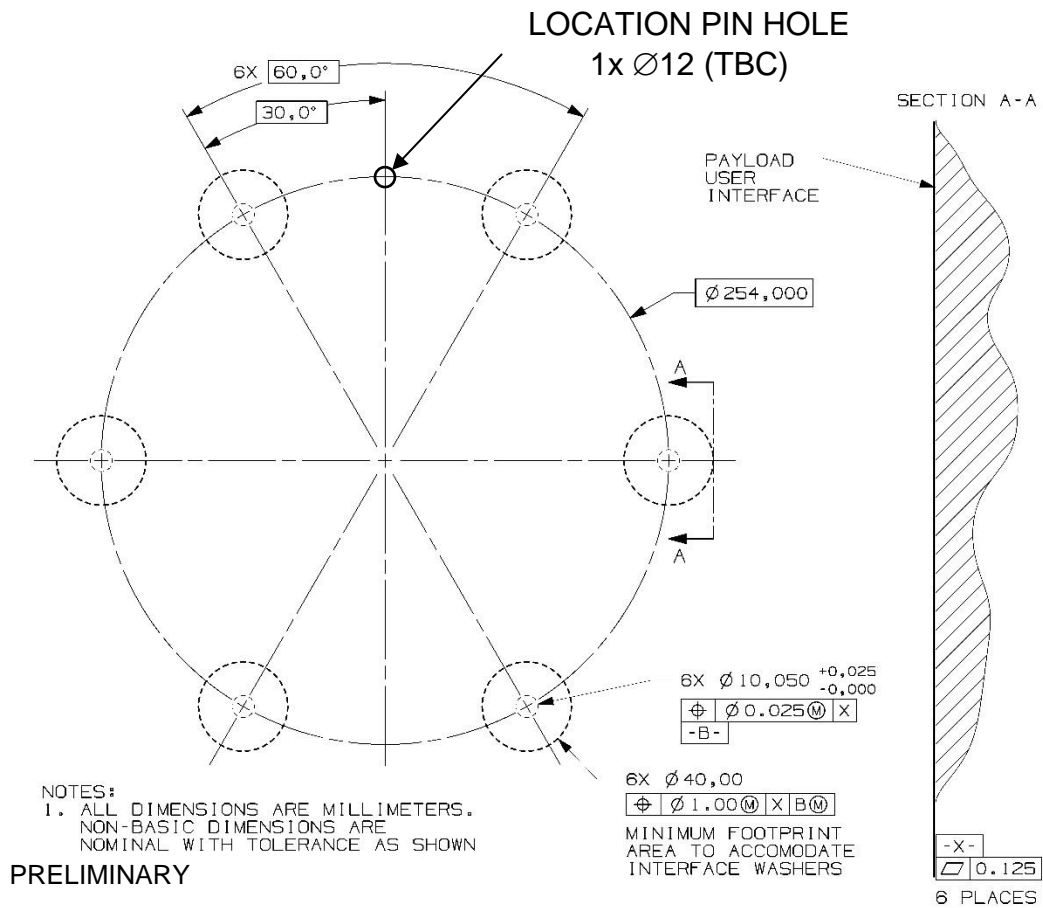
LARGE FIXTURE MOUNTING BOLT HOLE PATTERNS
